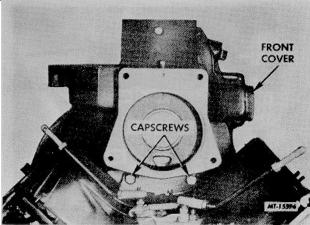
Location of Nylok Capscrews at Rear of Engine Front Cover
